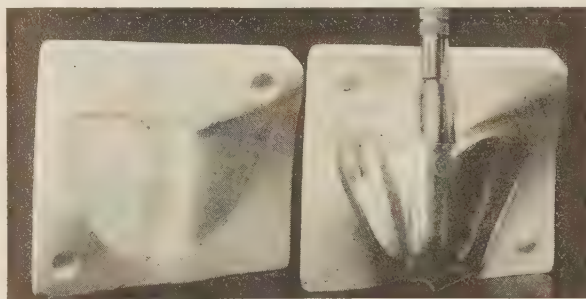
TYPE-2 PROPELLER WITH PLASTER MOLD
